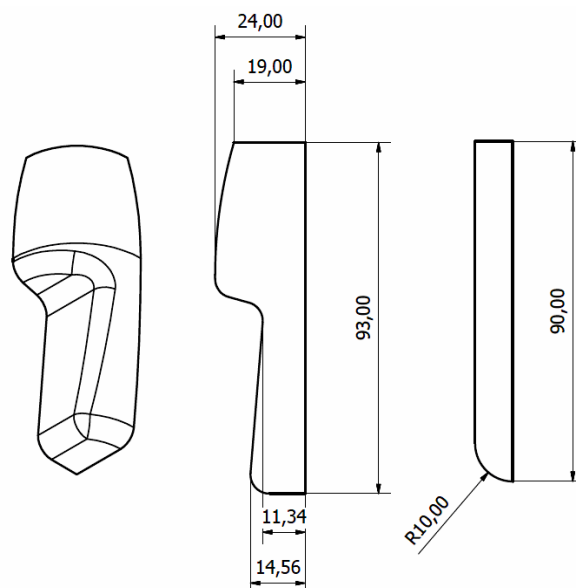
Simplification bottle CAD geometry container model (left) and initial preform shape (right) with dimensions
